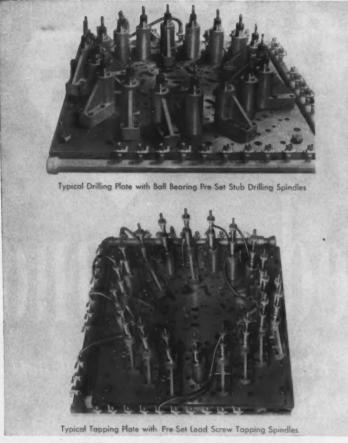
Drilling and tapping plates with preset spindles such as used on machine shown in Fig. 1
